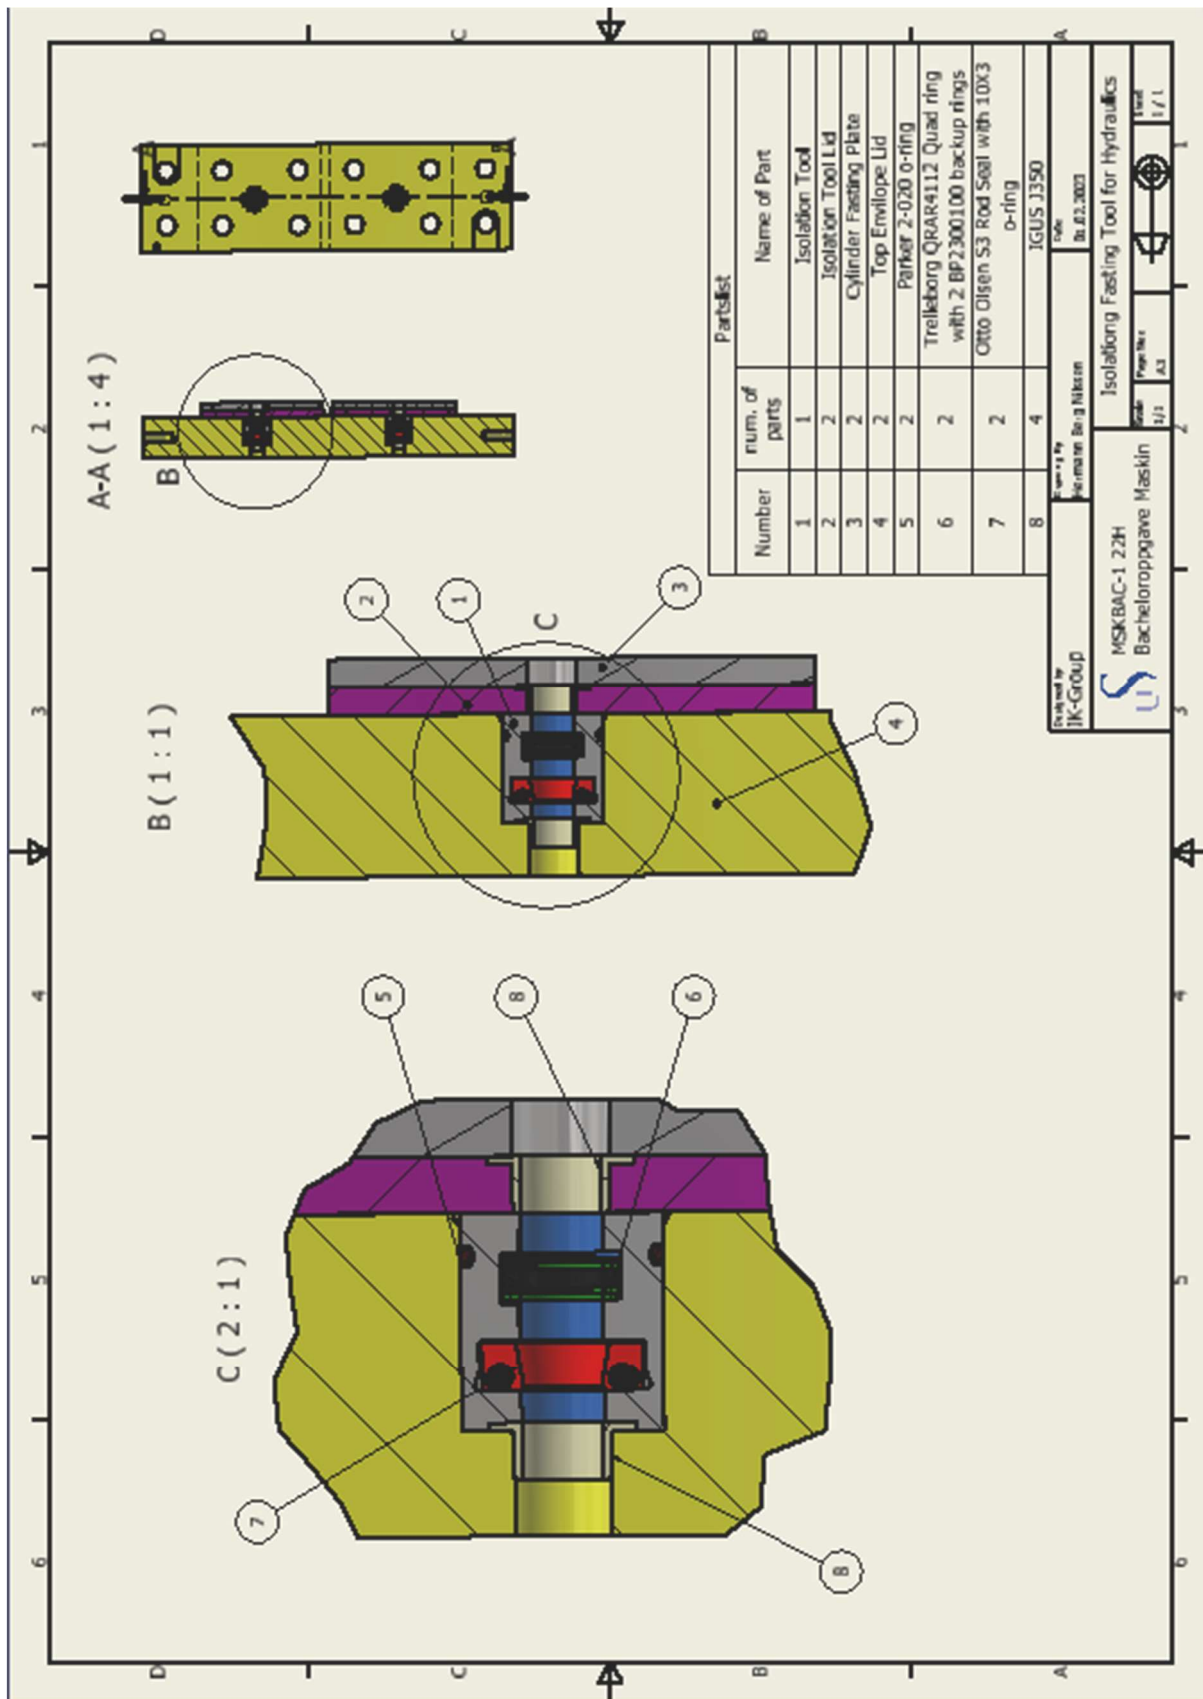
Isolating Fastening Tool for Hydraulics Assembly Drawing
